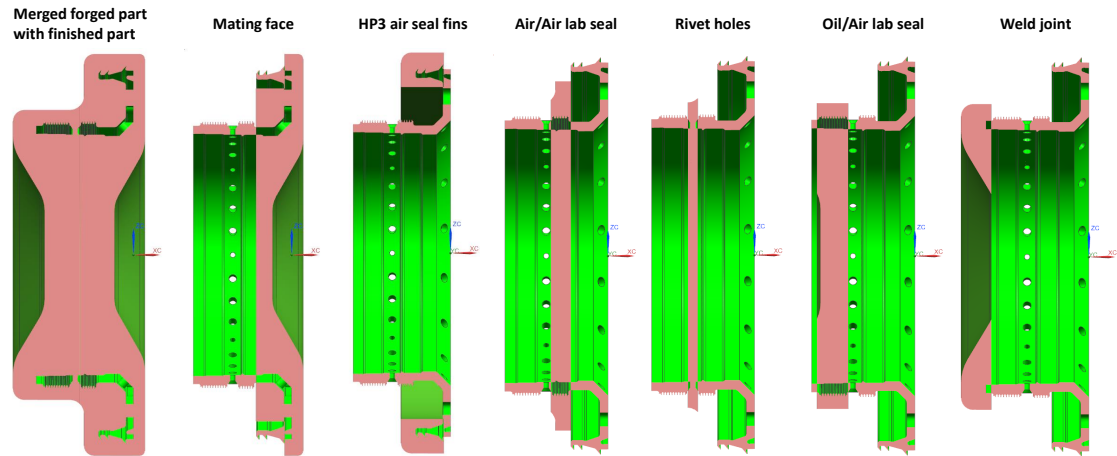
The amount of material that needs to be removed for each feature in order to get from the IPT Stub Shaft forging geometry to finished part geometry.
